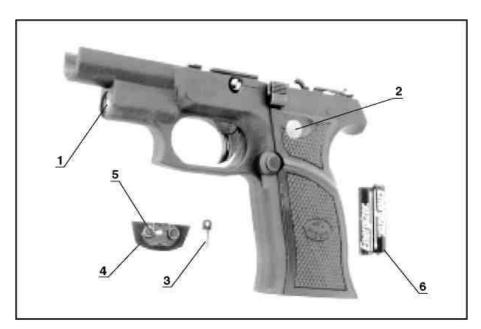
WIST 94L assembled receiver: 1 – laser module; 2 – laser pointer switch; 3 – eyebolt; 4 – plug with nut M3,5; 5 – spring; 6 – feeding batteries
